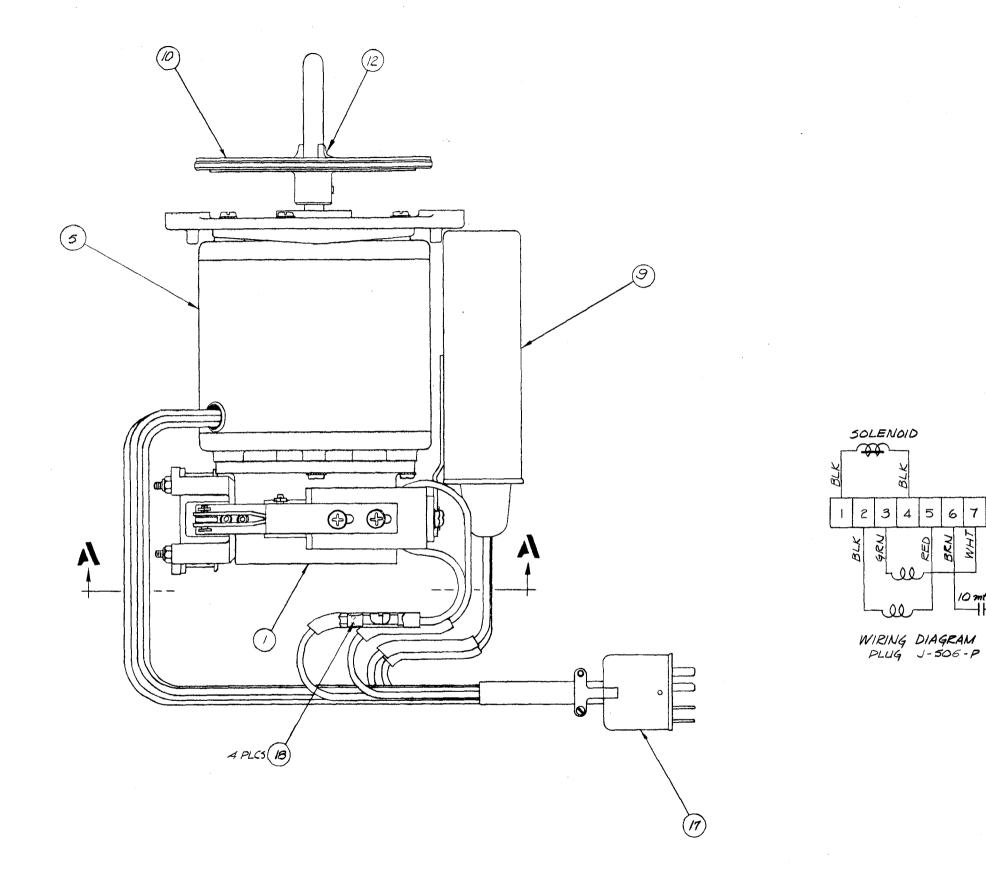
Typical Reel Drive Assembly (Rewind)
